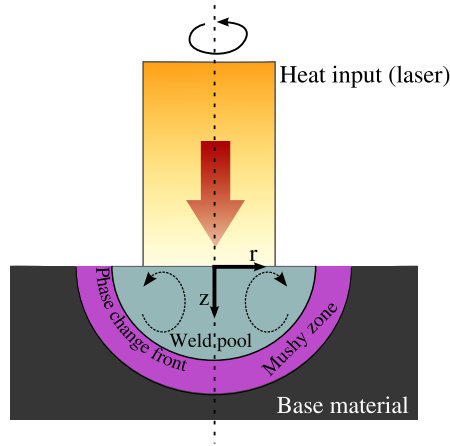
Problem setup in the welding case by Pitscheneder et al. [89]
